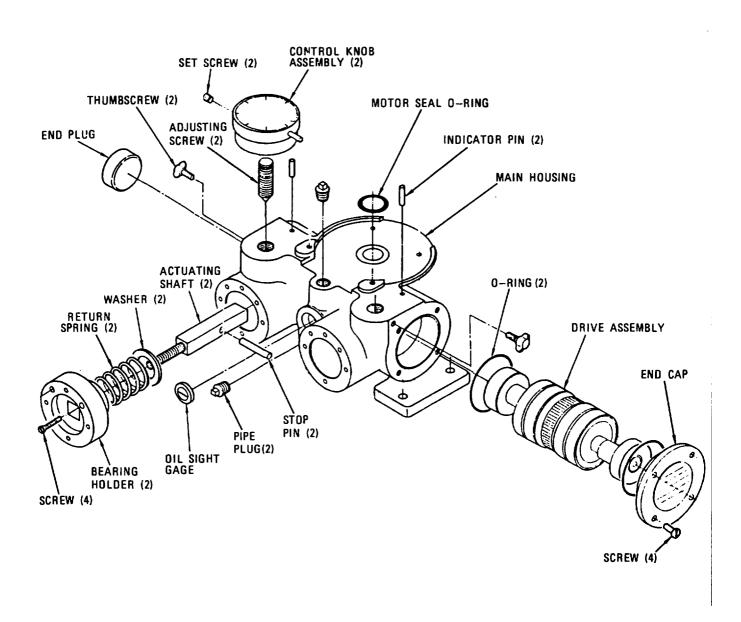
Chemical Solution Feeder Main Housing, Disassembly and Reassembly (Raider Model only).
